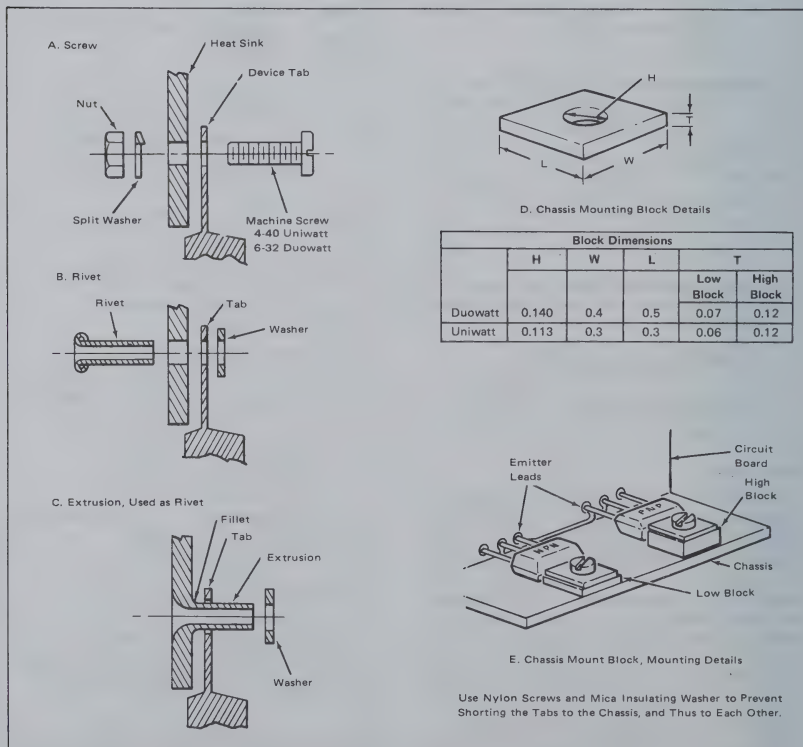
Methods of Mounting Duowatt and Uniwatt Transistors to a Heat Sink
